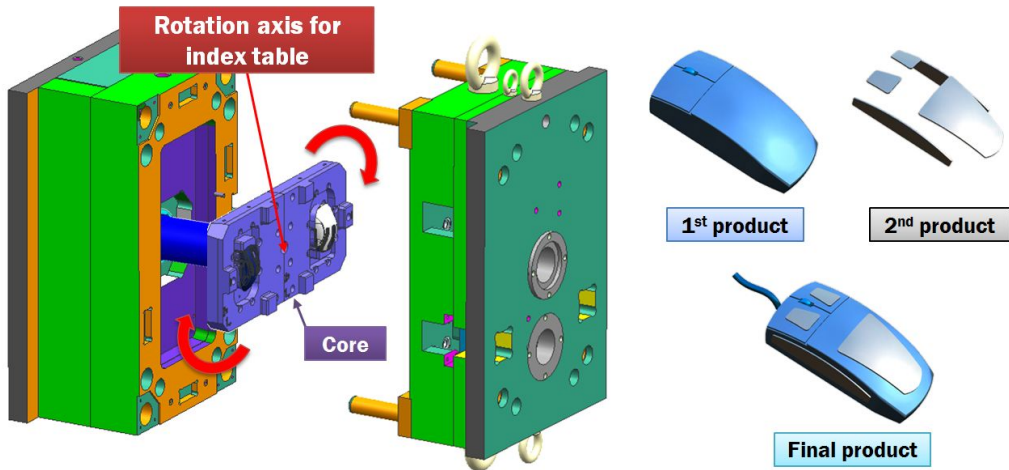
Concept of double-shot injection moulding using rotation of the index-axis
